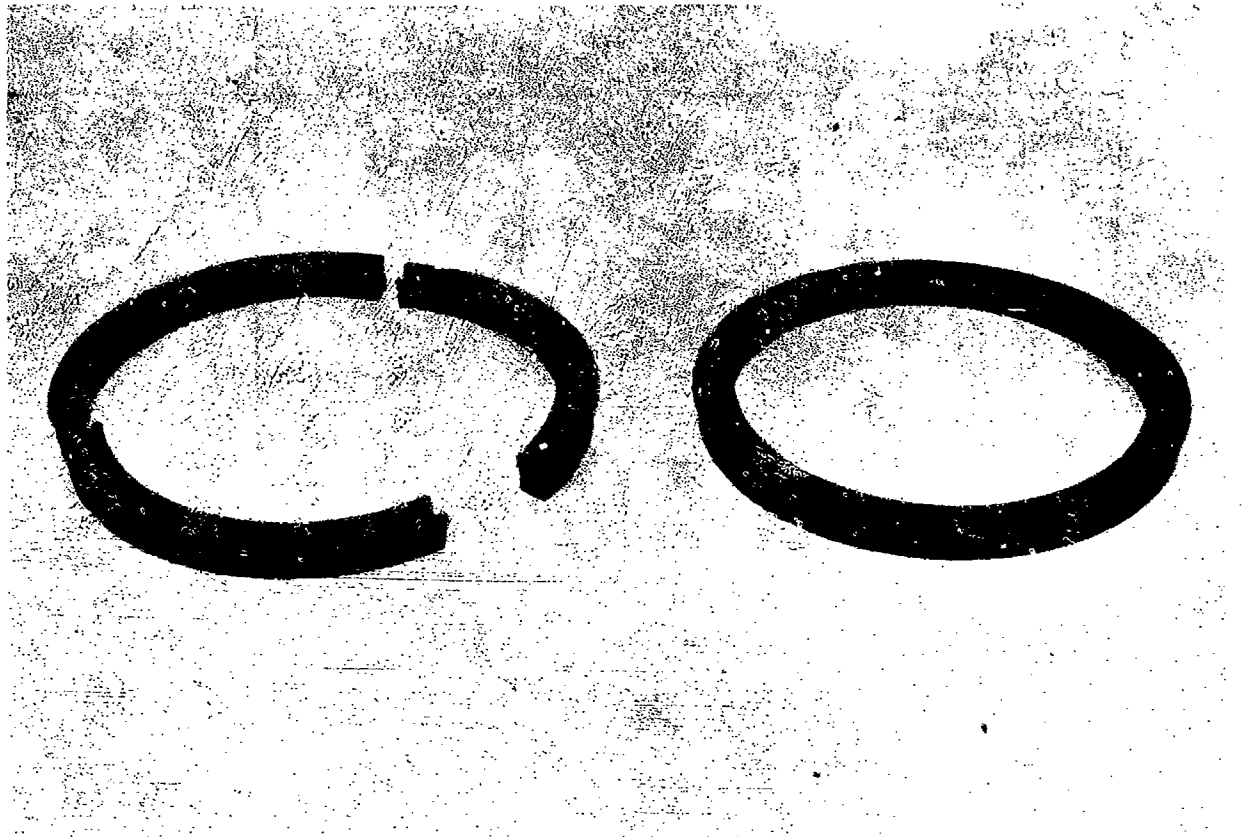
L/C-1 Chevron Helicopter Seal and Cut Test Sections.
